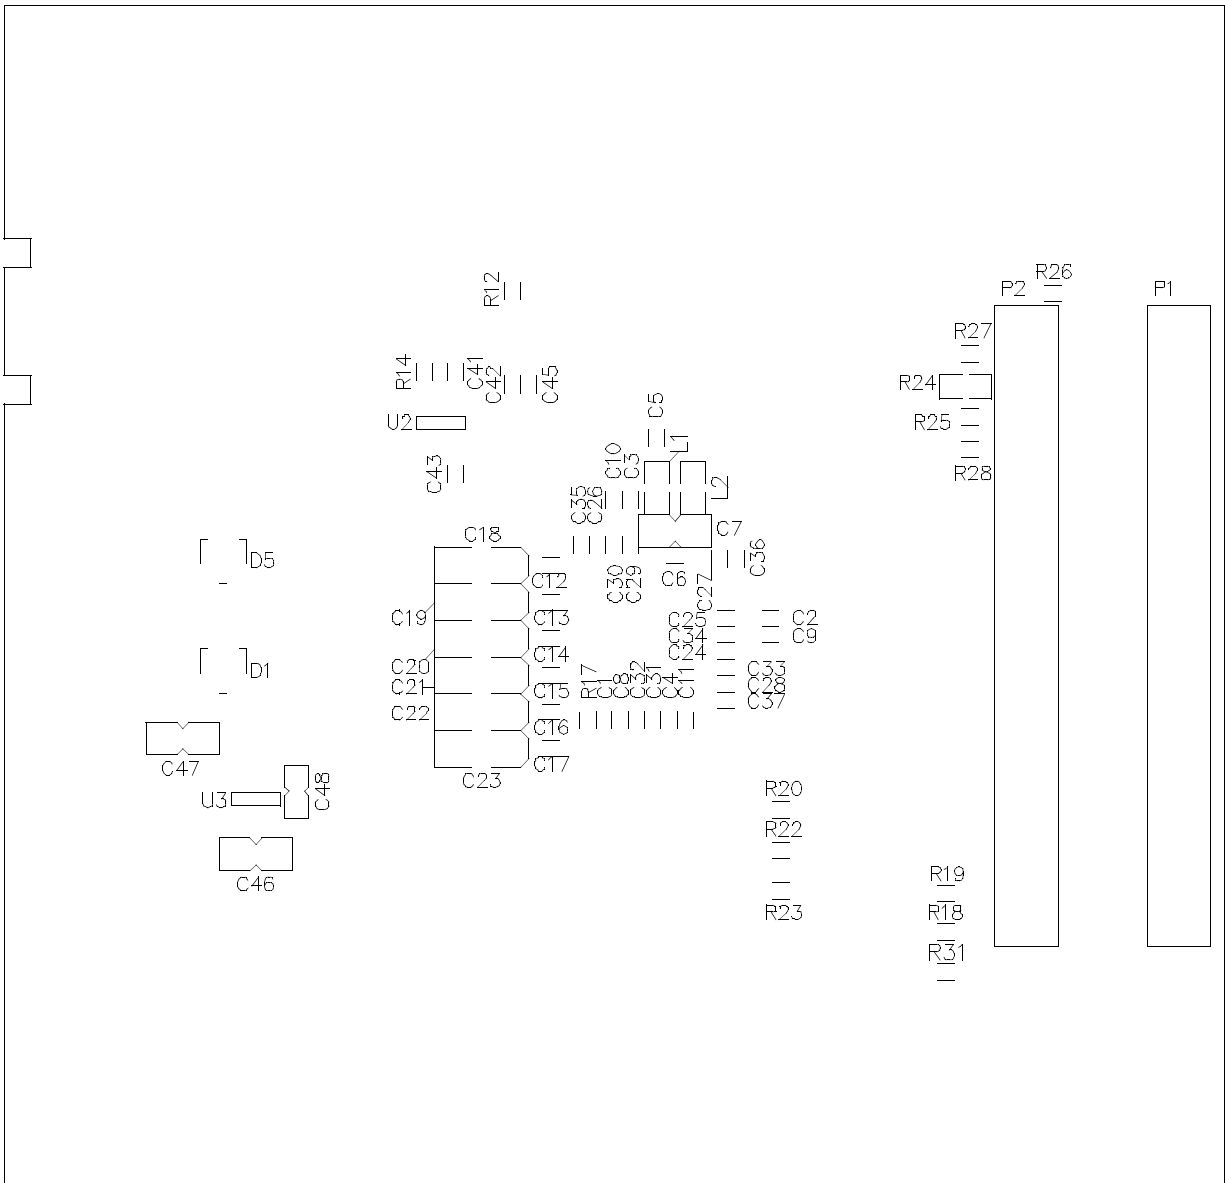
S5U13746P00C100 Board Layout - Bottom View
